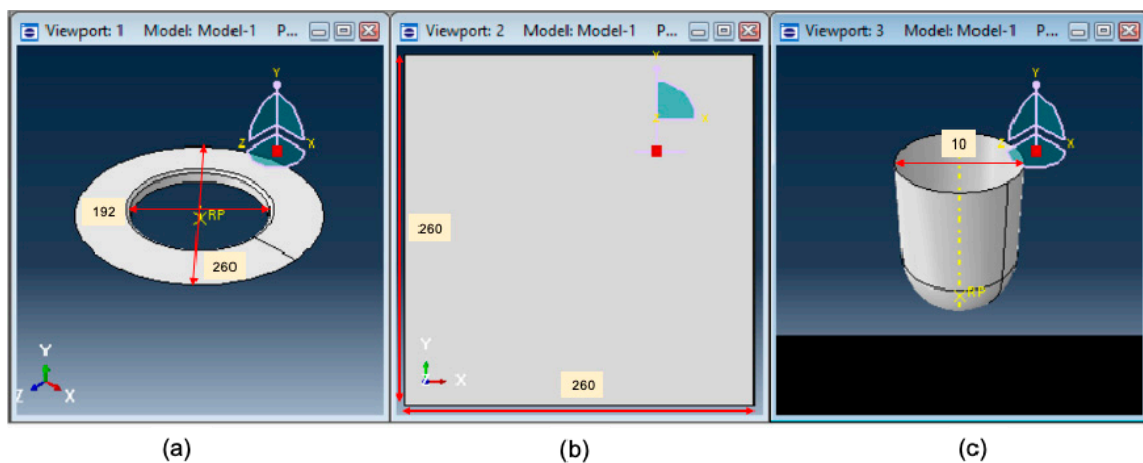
Parts used in ABAQUS with dimensions (All dimensions are in mm): (a) Tool holder; (b) Sheet; (c) Forming tool.
